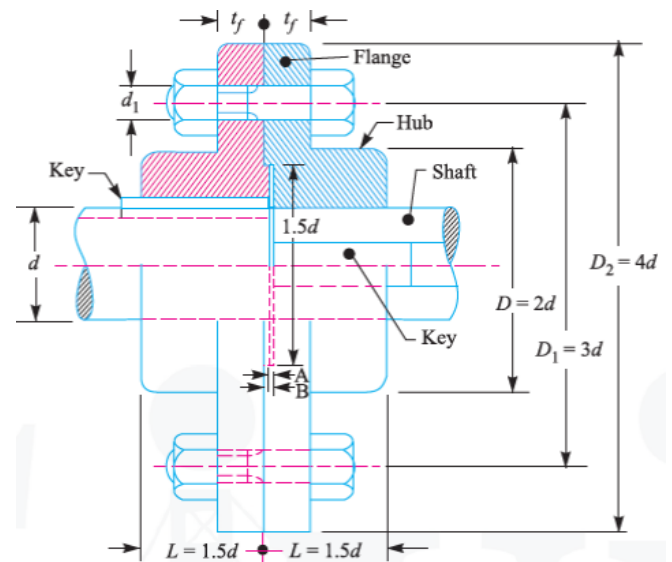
SECTIONAL VIEW OF FLANGED COUPLING
